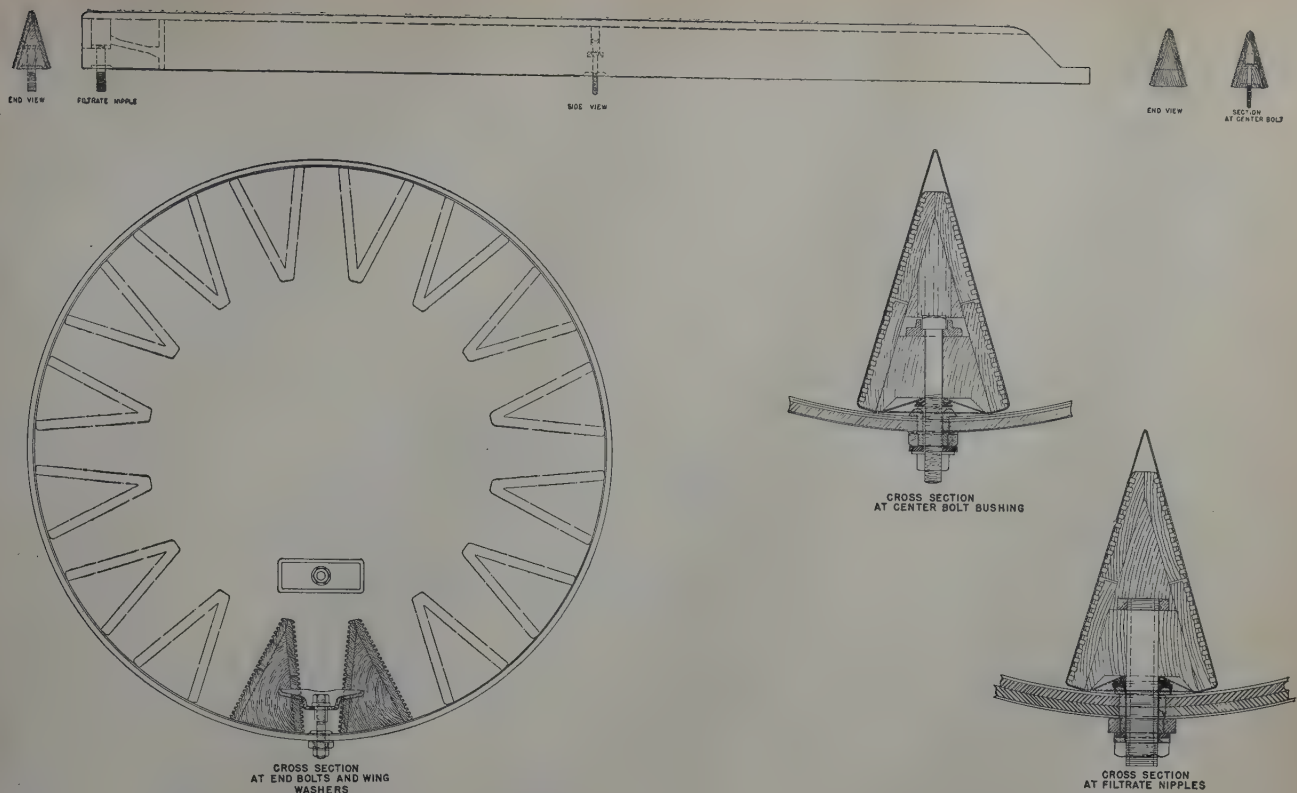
Various views of filter board and manner of attachment to inside of shell.
